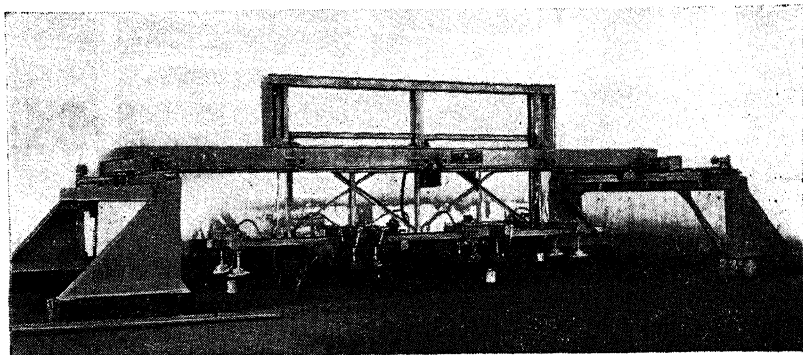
A sheet unpiler of arc welded steel construction.
